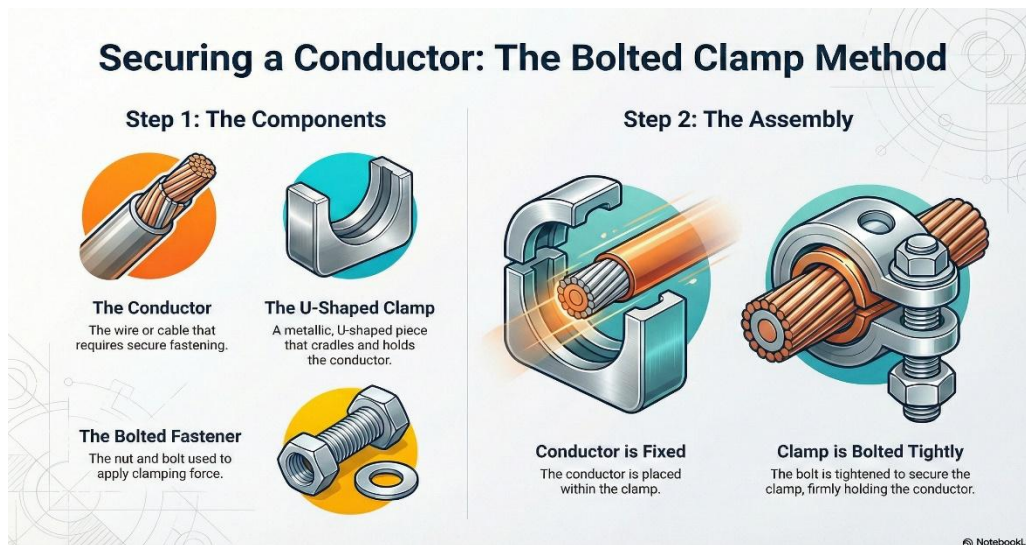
Fig. A conductor fixed with a U-shaped metallic clamp bolted tightly.
